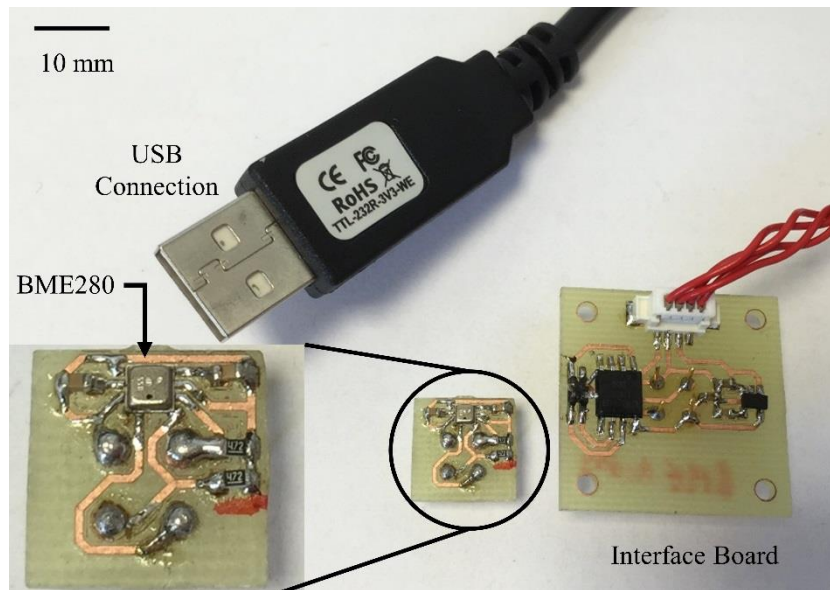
Photograph of a BME280 chip mounted on a circuit board. The interface board converts the sensor output to serial communication which is then converted to the USB inside the connector shown.
